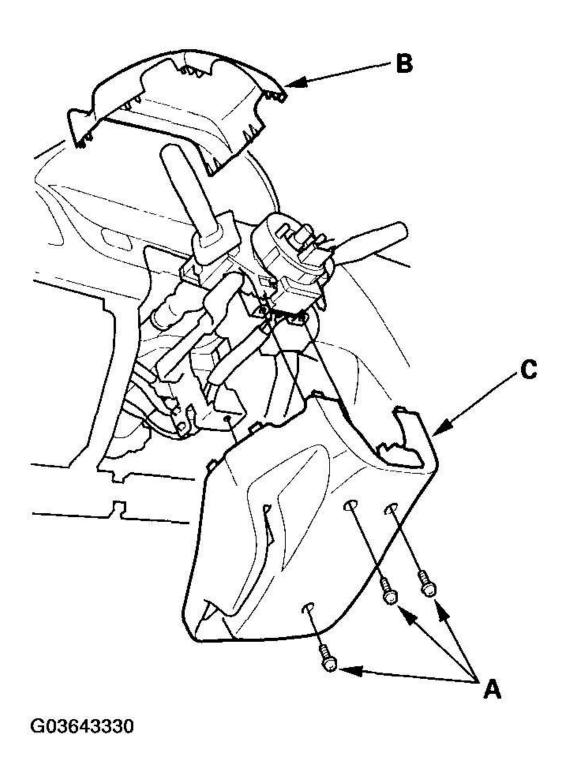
Removing Column Cover Courtesy of AMERICAN HONDA MOTOR CO., INC.
